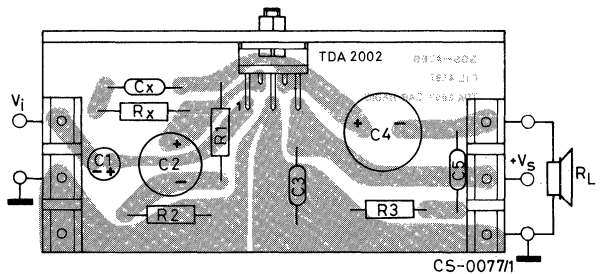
P.C. board and component layout for the circuit of fig. 16 (1:1 scale)
